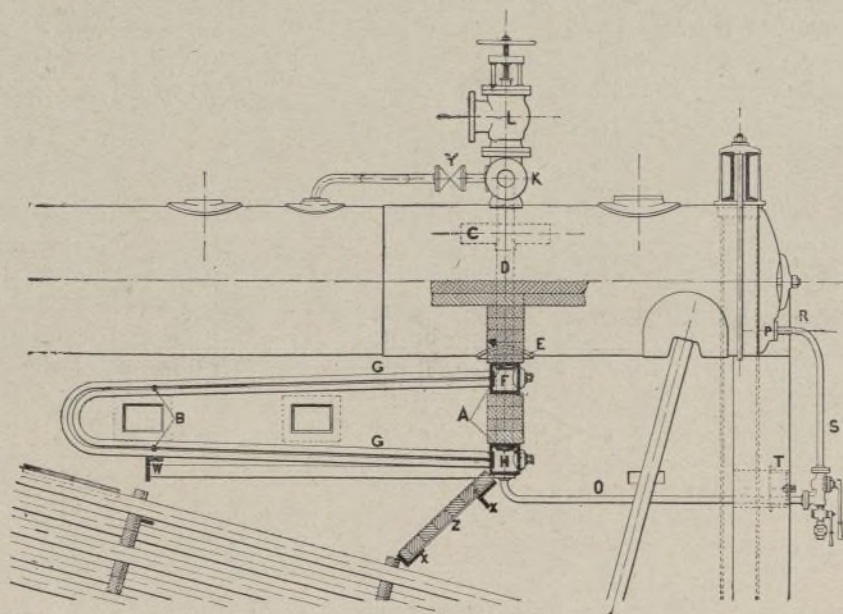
THE BABCOCK AND WILCOX STEAM SUPERHEATER.
